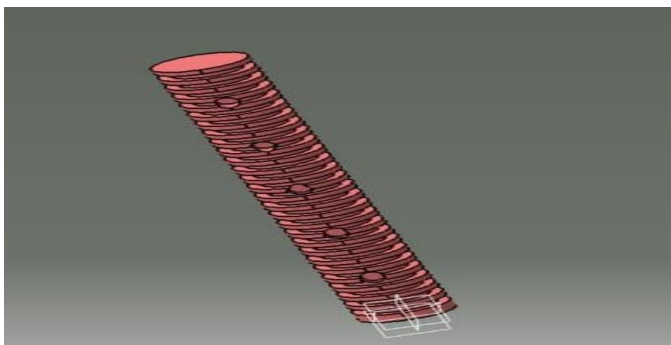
Circular Threaded Pin Fin by using CATIA software.
